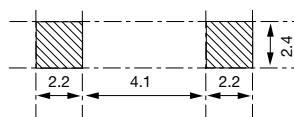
CSM-8A – Recommended Solder Pad Layout Top view
